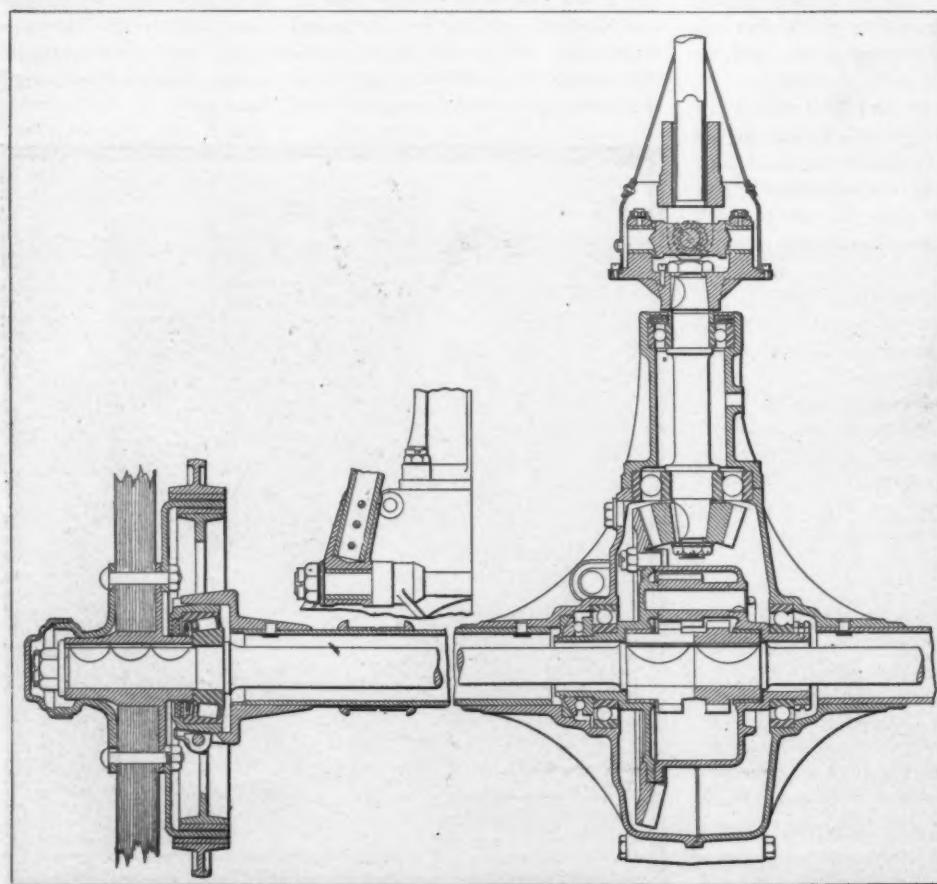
Drawn steel brake drum and housings for universal joints, as used in Pierce-Arrow live rear axles
